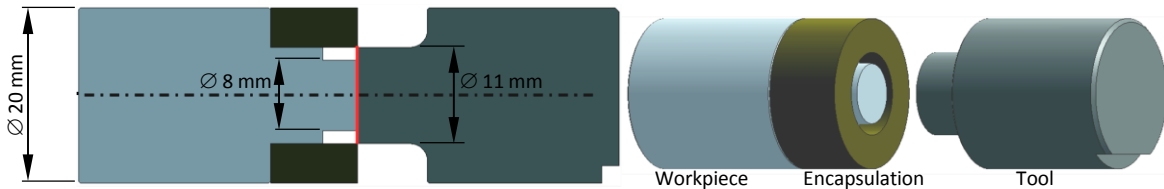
Schematic of the test specimen for the compression-torsion tribometer. [Teller et al., 2015a]
